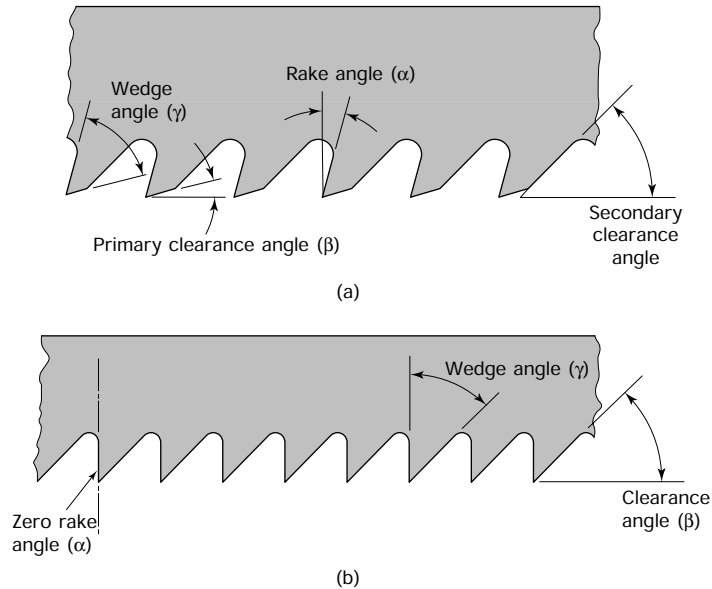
Hacksaw blade teeth: (a) heavy duty power saw blade – tooth form gives high strength coupled with adequate chip clearance; (b) light duty hand saw blade showing simplified tooth form used for fine tooth blades
